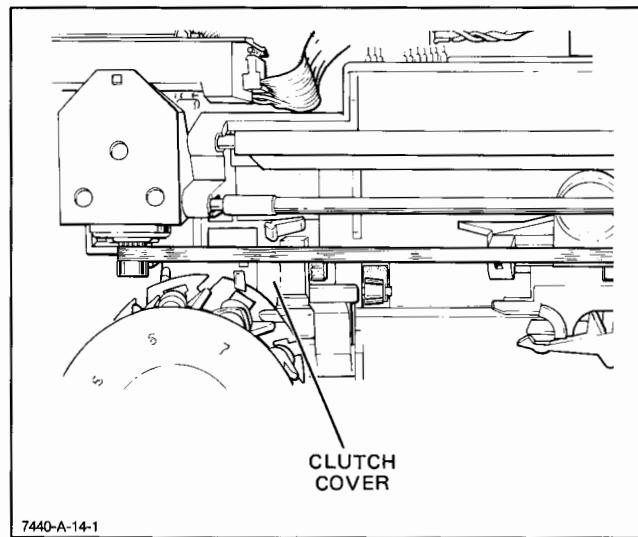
Left Pinch Wheel Arm Removal, Detail C
